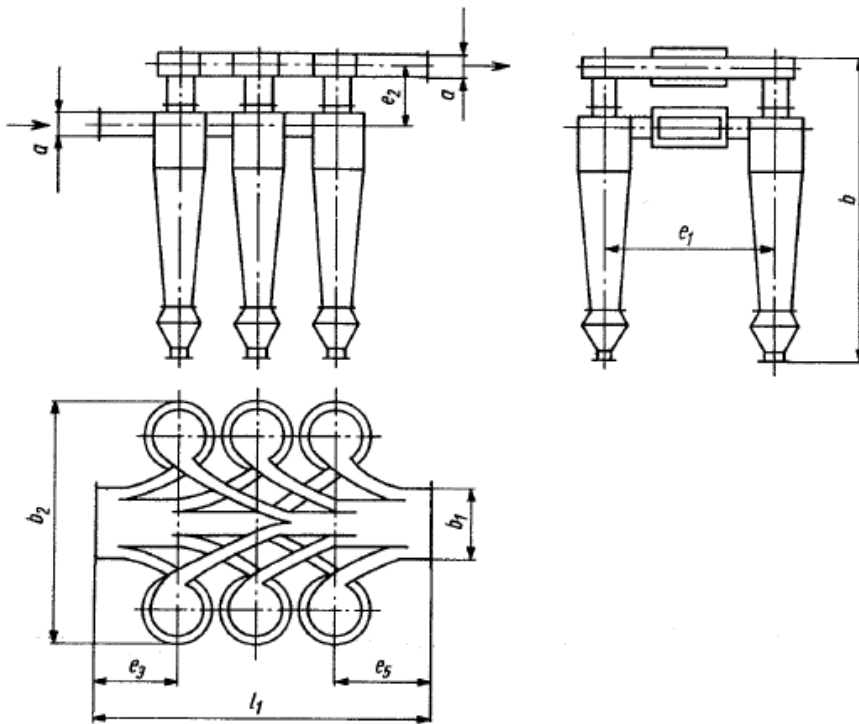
Typical dimensions of a centrifugal dust separator (multi-unit parallel arrangement)[16]
